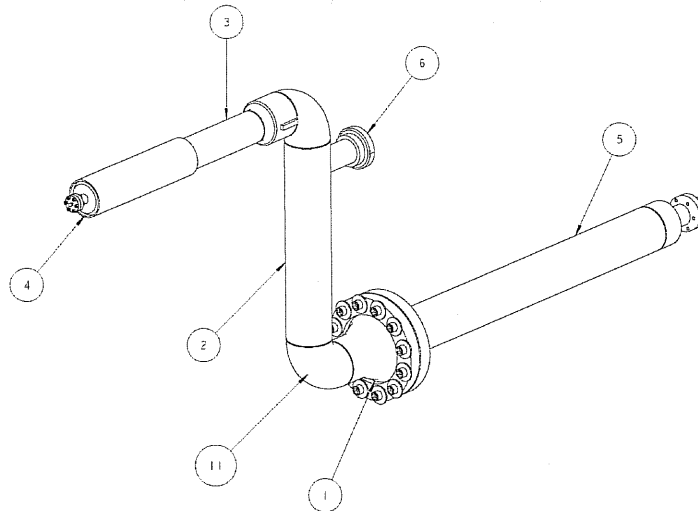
Isometric view of MBX1. 1-Housing with Lambda Plug; 2-Vertical Pipe Section; 3-Horizontal Section (this connects to magnet); 4-test Cap (this is removed for tunnel installation); 5-Conductor Protection Tube (this is removed for attachment to DFBX); 6-Helicoflex Sealing system; 11-Short Radius 3 IPS Weld Elbow.
